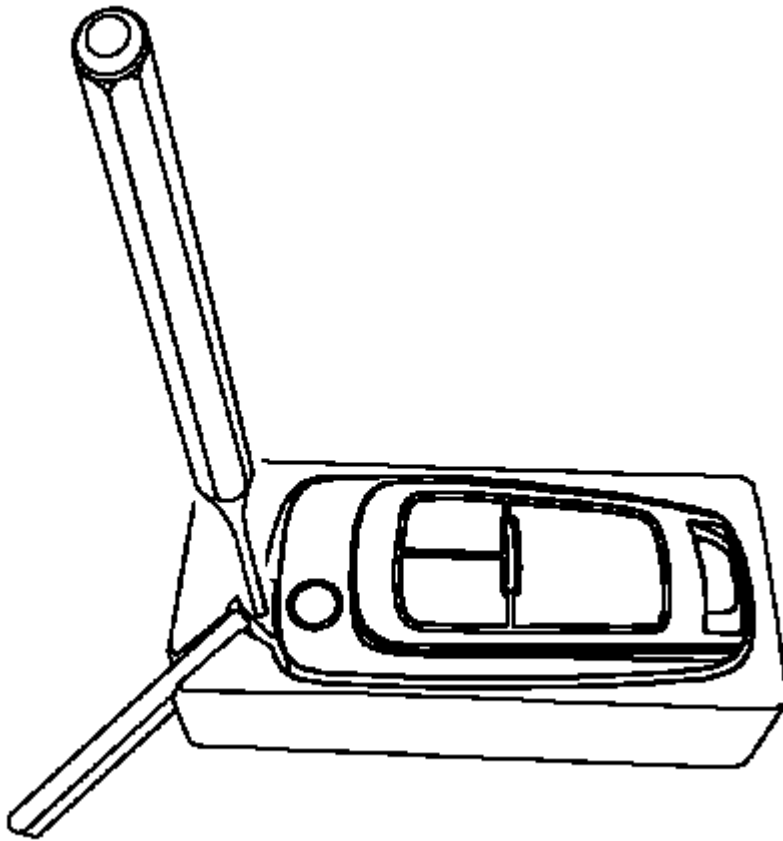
Flip Key Blade Fixture & Transmitter Assembly
